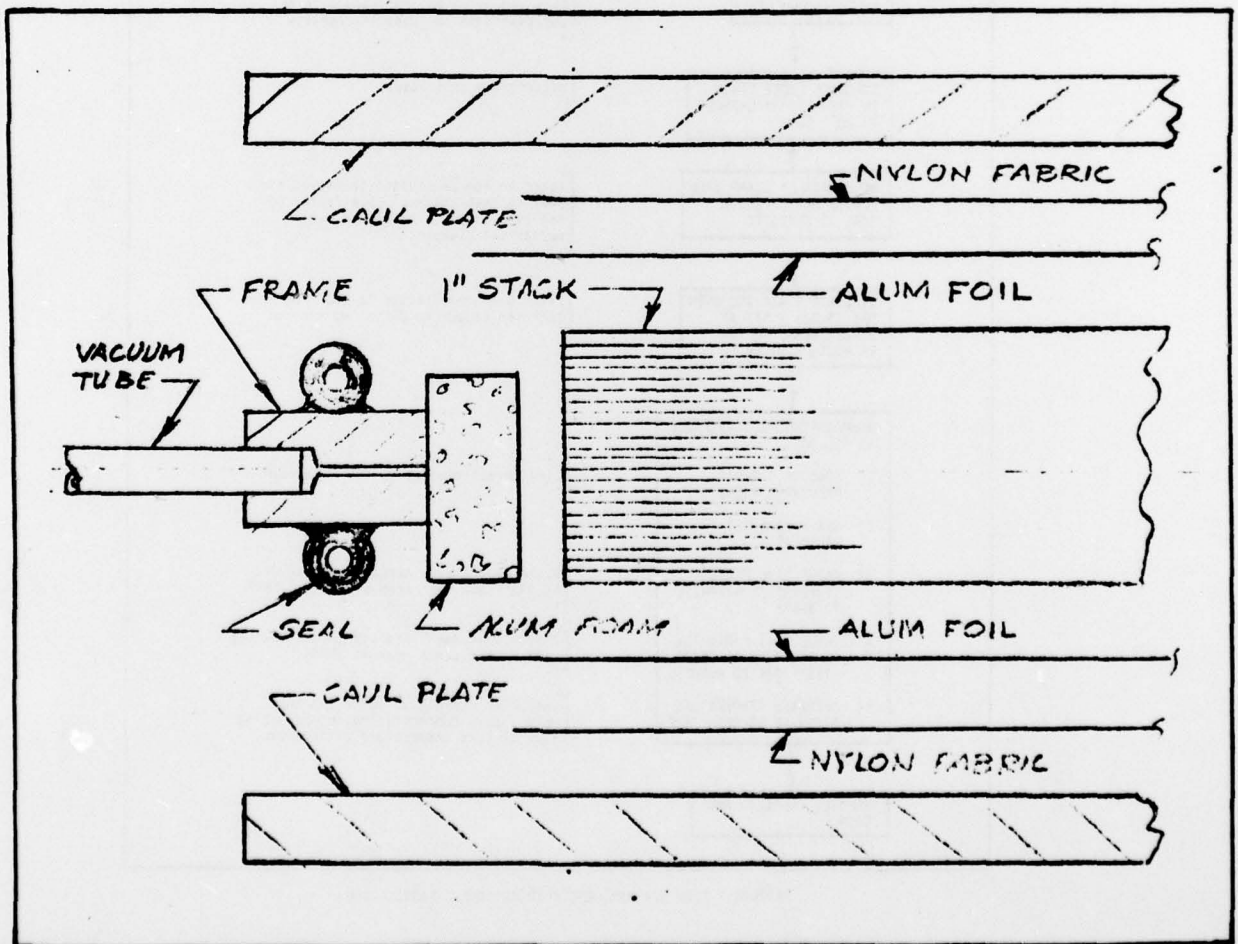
MOLDING ASSEMBLY, 1 INCH PANELS
